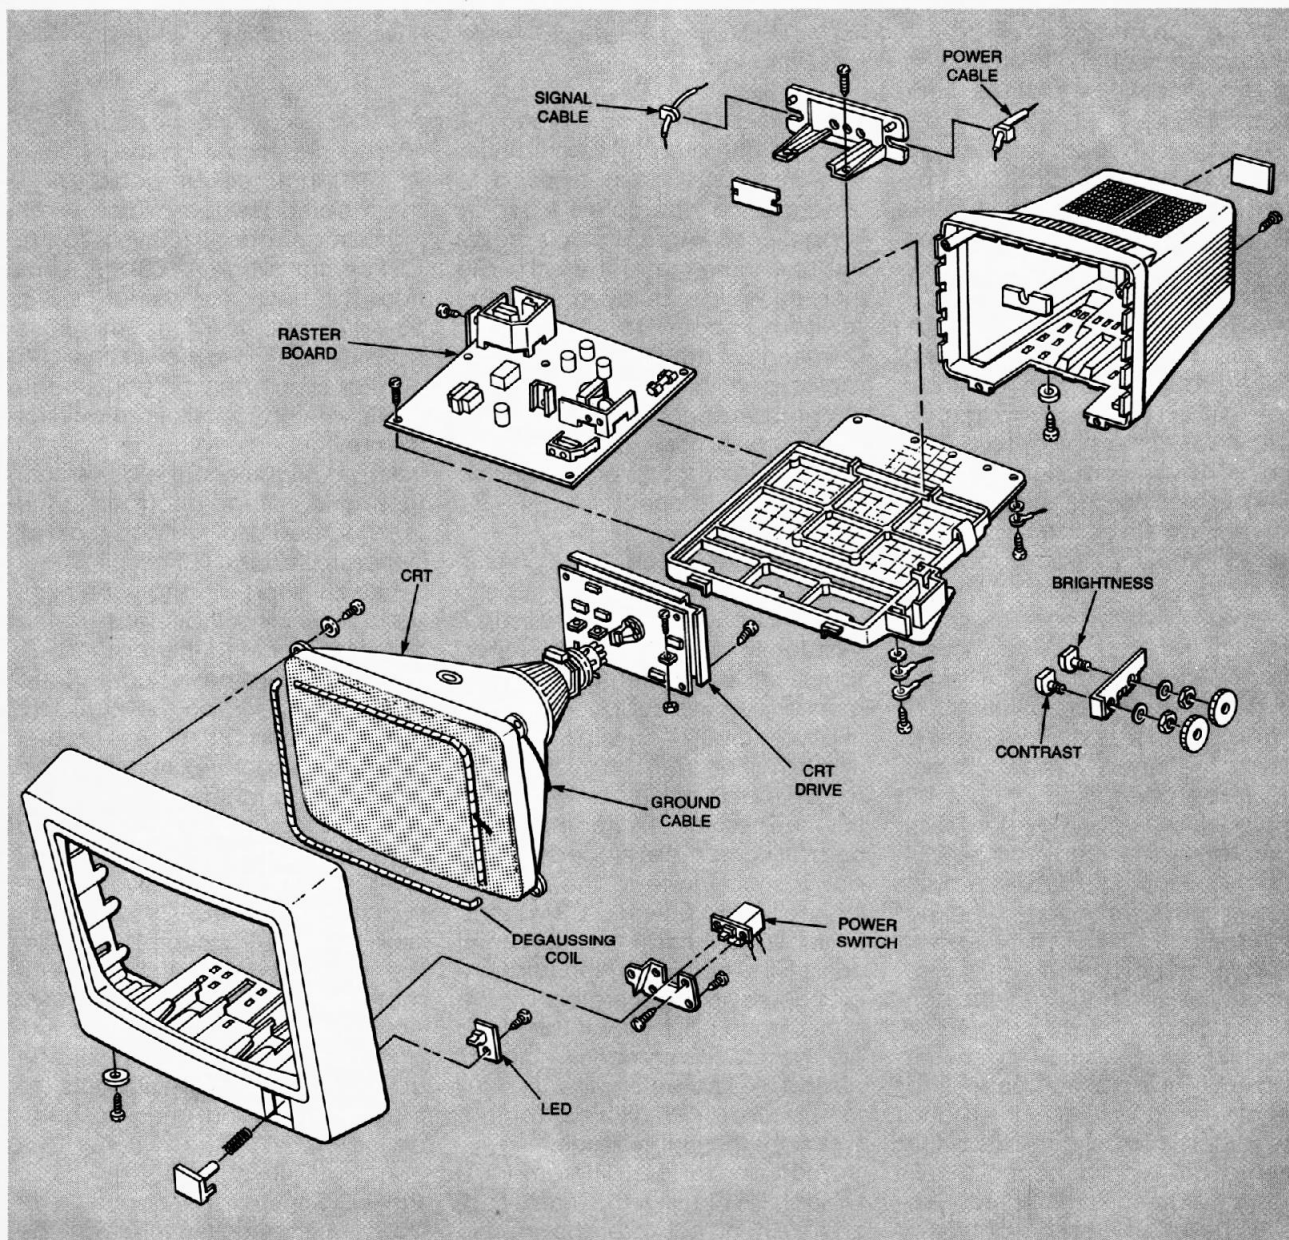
Inside a typical monitor. This exploded view shows the CRT, the main or raster board, the CRT-drive board, and more. (Illustration Courtesy of Tandy Corporation).
